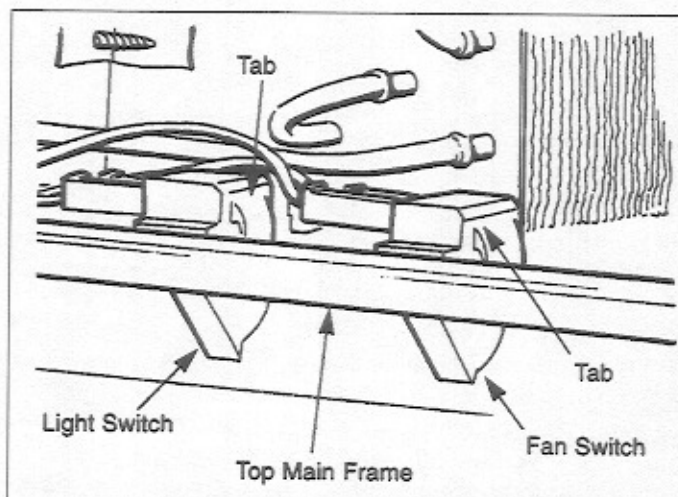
Model 611, 632, 642, 650, 690 Light & Fan Switches
